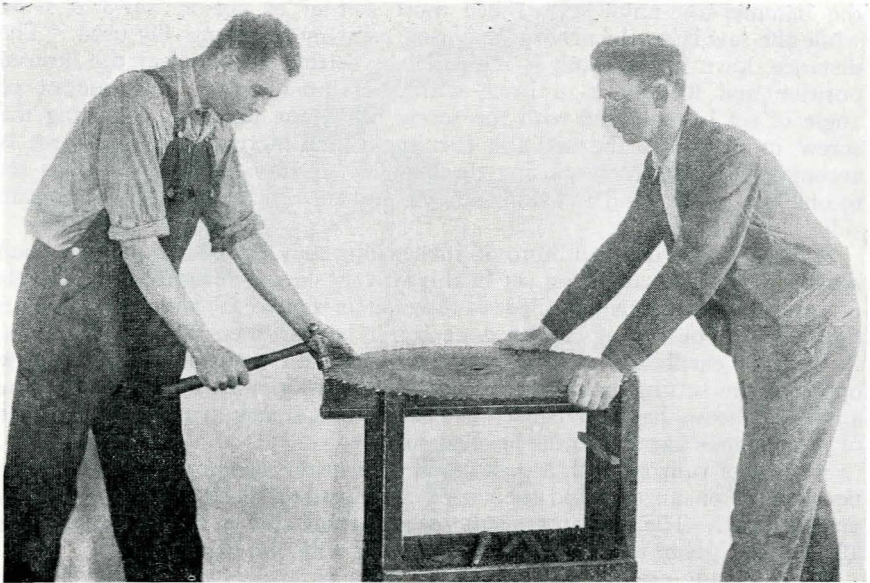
USING A PIECE OF RAILROAD RAIL AS A SETTING BLOCK
